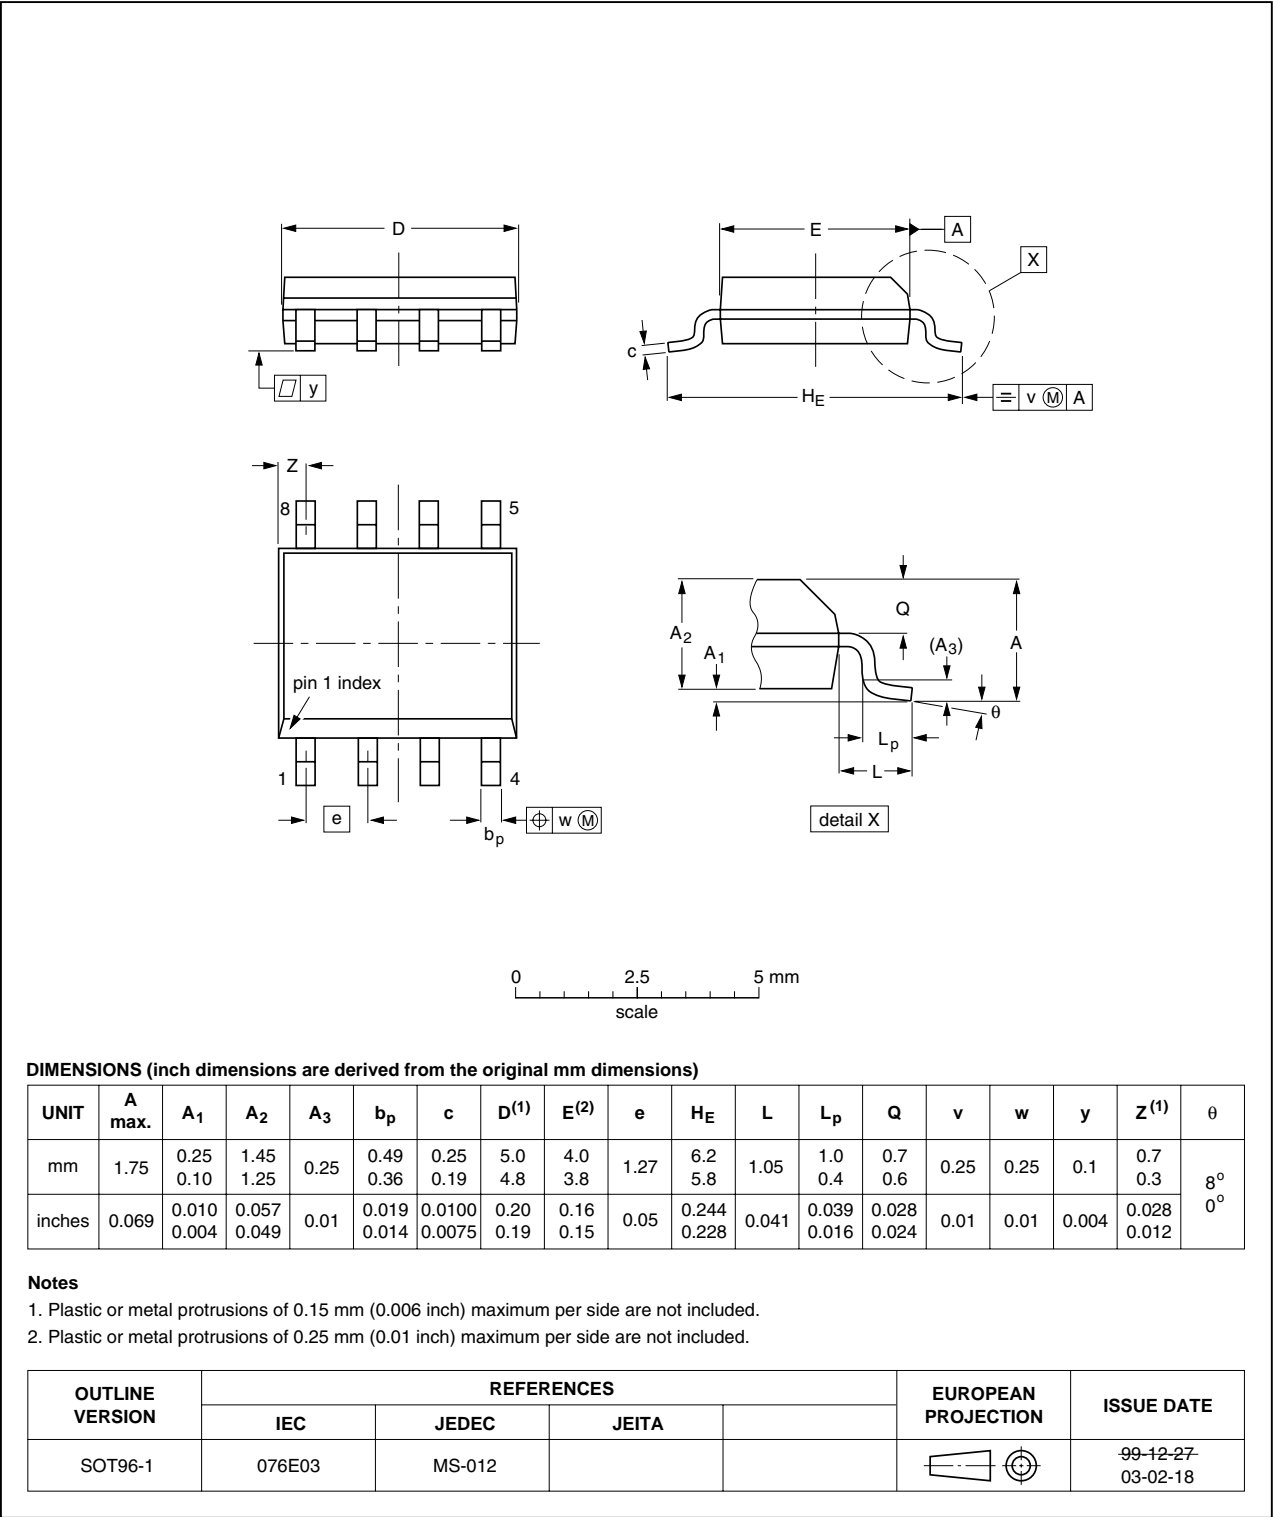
Package outline SOT96-1 (SO8/MS-012)
